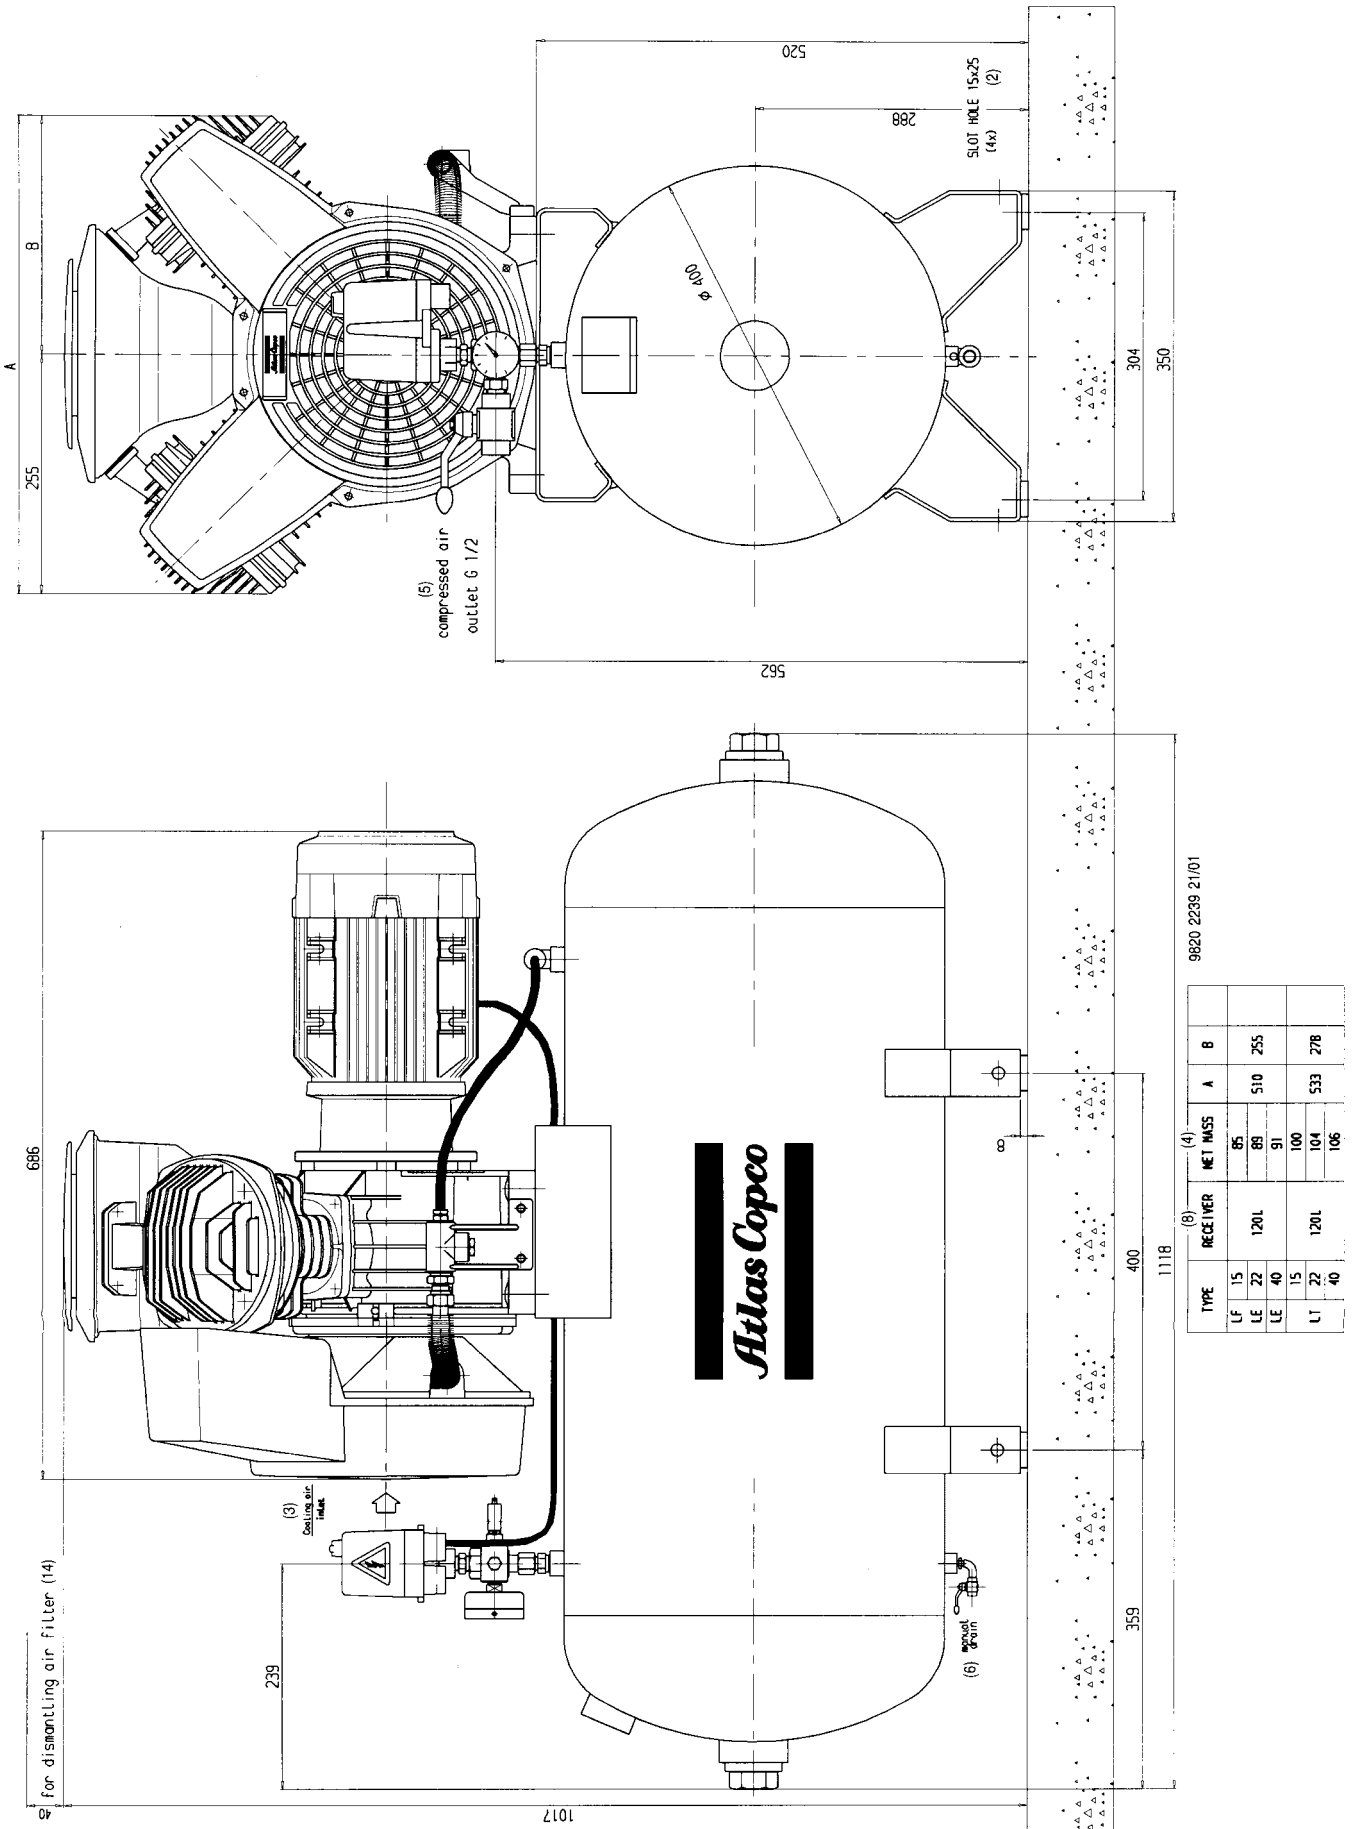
Dimension drawing, LE/LT15 up to -40 and LF15/22 Complete Unit (horizontal 120 l receiver)
